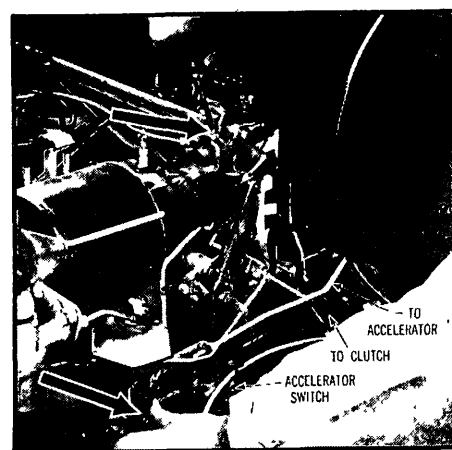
Accelerator cross shaft adjustment, 1942-47
